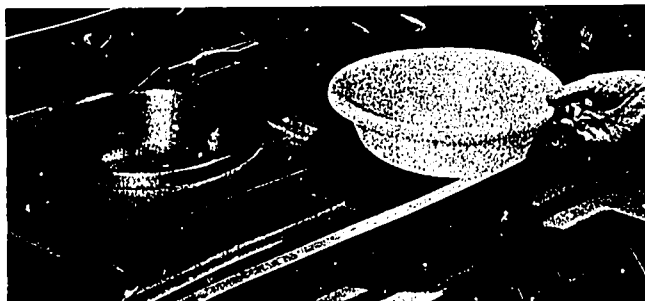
In component making, a plastic sheet is vacuum-formed over an aluminum die to produce a dishpan.
